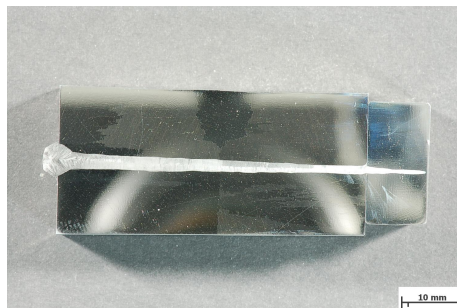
Electron beam joints of Alloy 625, weld thickness: 50mm, voestalpine Foundry Traisen, 2013
